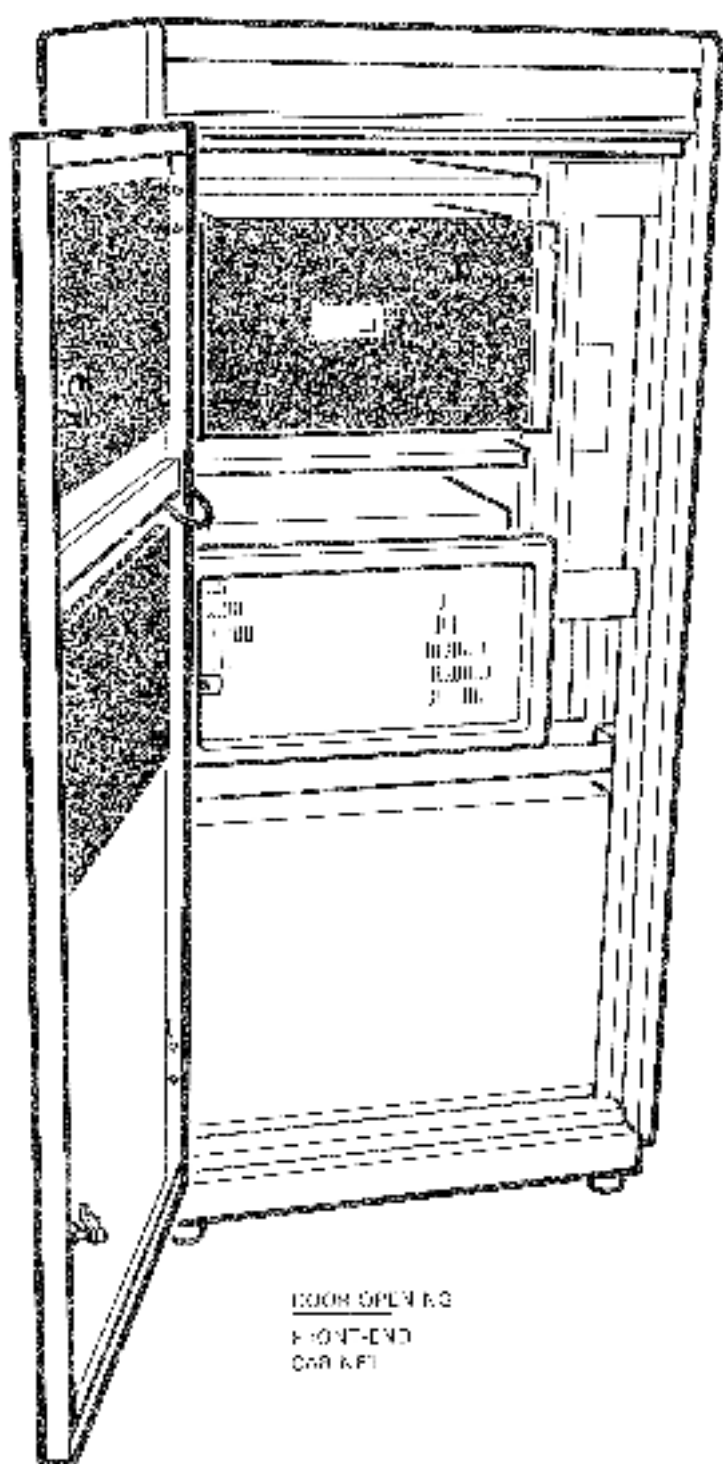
CPU and Front-End Cabinet Mating (Sheet 3 of 9)
